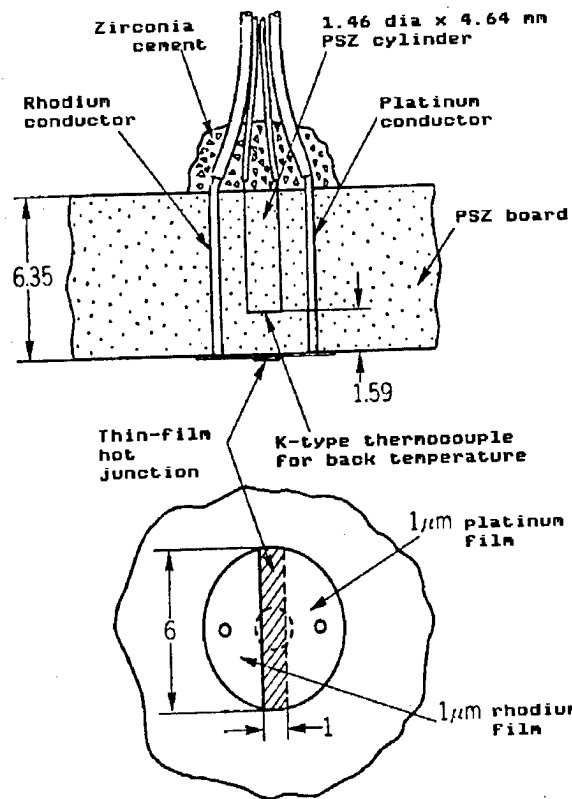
Thin Film-Type Surface Thermocouple for PSZ Boards
